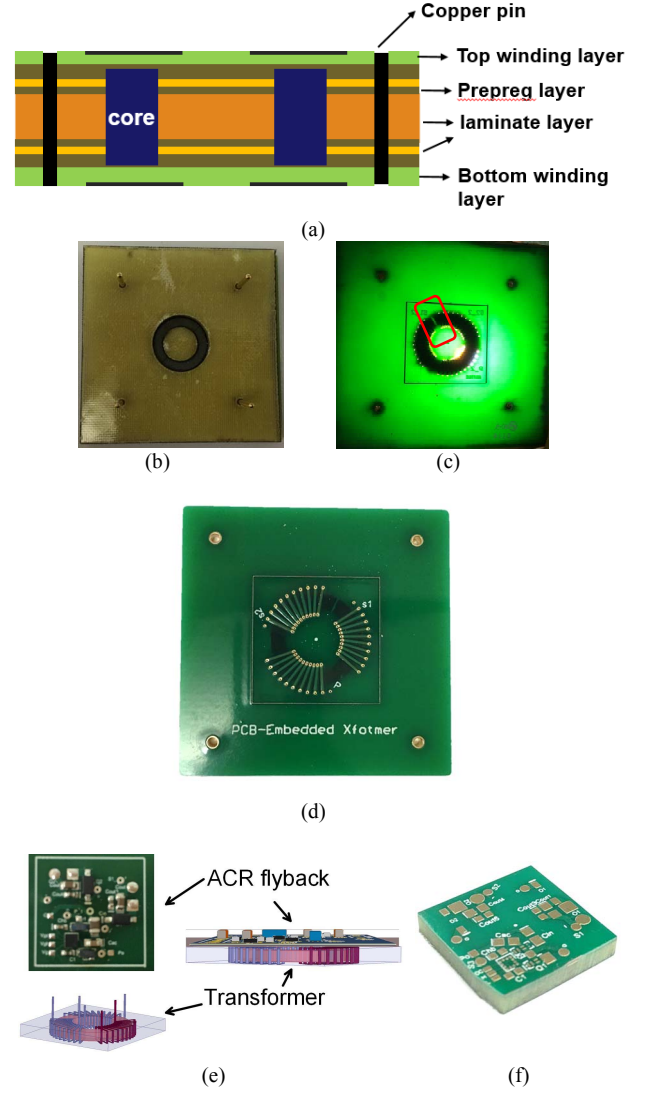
(a) PCB lamination layer stack illustration; (b) layer stack before lamination; (c) toroidal PCB-embedded transformer, whose core and air gap are highlighted; (d) toroidal PCB embedded transformer; (e) connection of the toroidal PCB-embedded transformer and the converter; (f) converter after final lamination.
